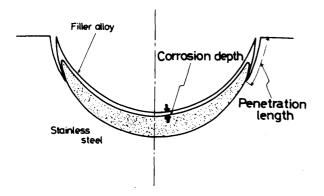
Schematic illustration of corrosion of silver brazed stainless steel.
